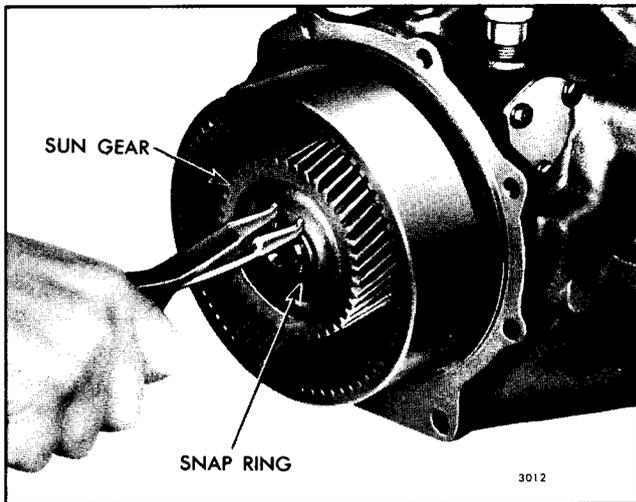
Removing or Installing Reduction Gear Sun Gear Snap Ring from/on Input Shaft (2.5:1 and 3:1 Ratio)
